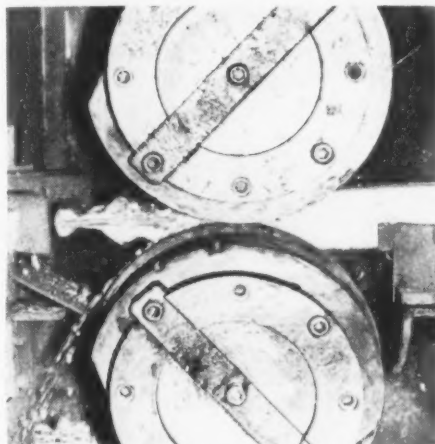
Heated crankshaft billets are reduced automatically in the rolls shown here. The billet passing through the rolls is being shaped to facilitate press forging.
